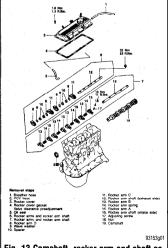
Camshaft, rocker arm and shaft assemblies-1.5L engine
